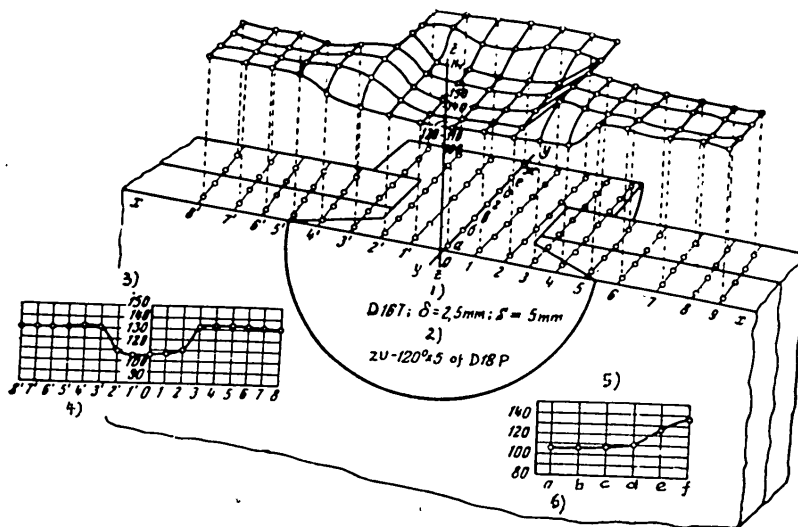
Hardness of the Rivet and Sheet Material at Various Points of the Joint (Press Riveting)
